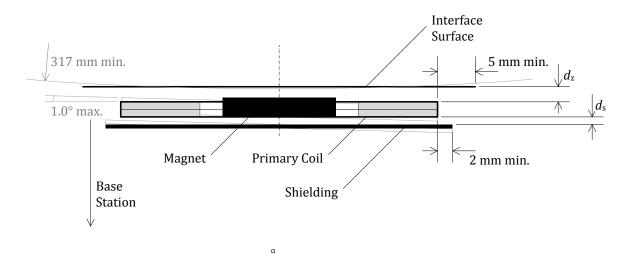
Primary Coil assembly of Power Transmitter design A1
